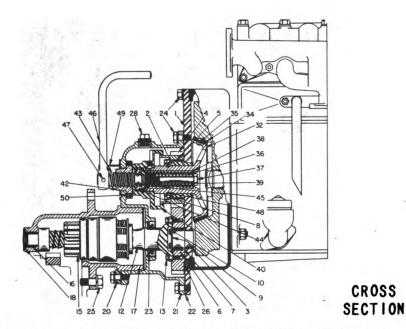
STARTING UNIT TRANSMISSION ASSEMBLY
